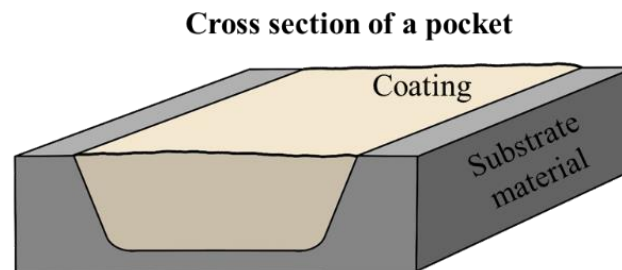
Schematic drawing of a cross section of a pocket with protective coating
